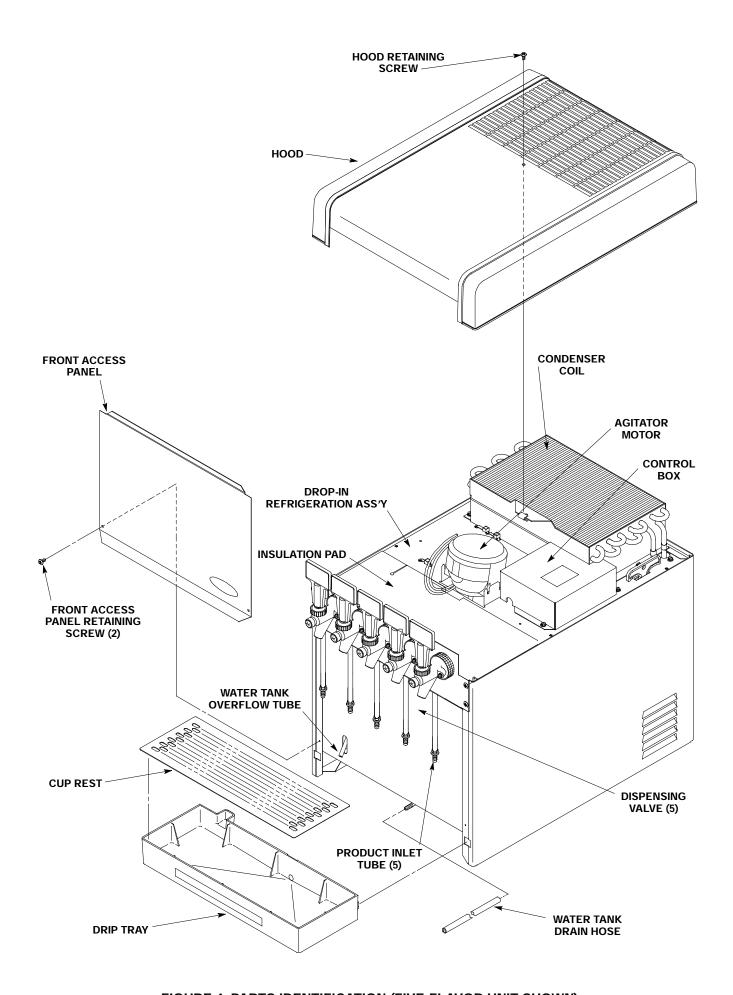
PARTS IDENTIFICATION (FIVE-FLAVOR UNIT SHOWN)
